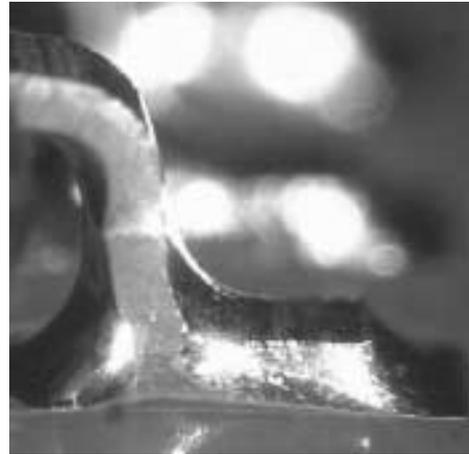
SnPb Finish NS, SnPbAg Solder, OSP PWB Finish
